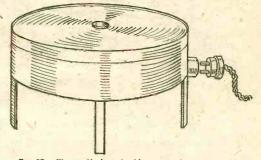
Electrically heated soldering pot showing central hole to accommodate spigote,
